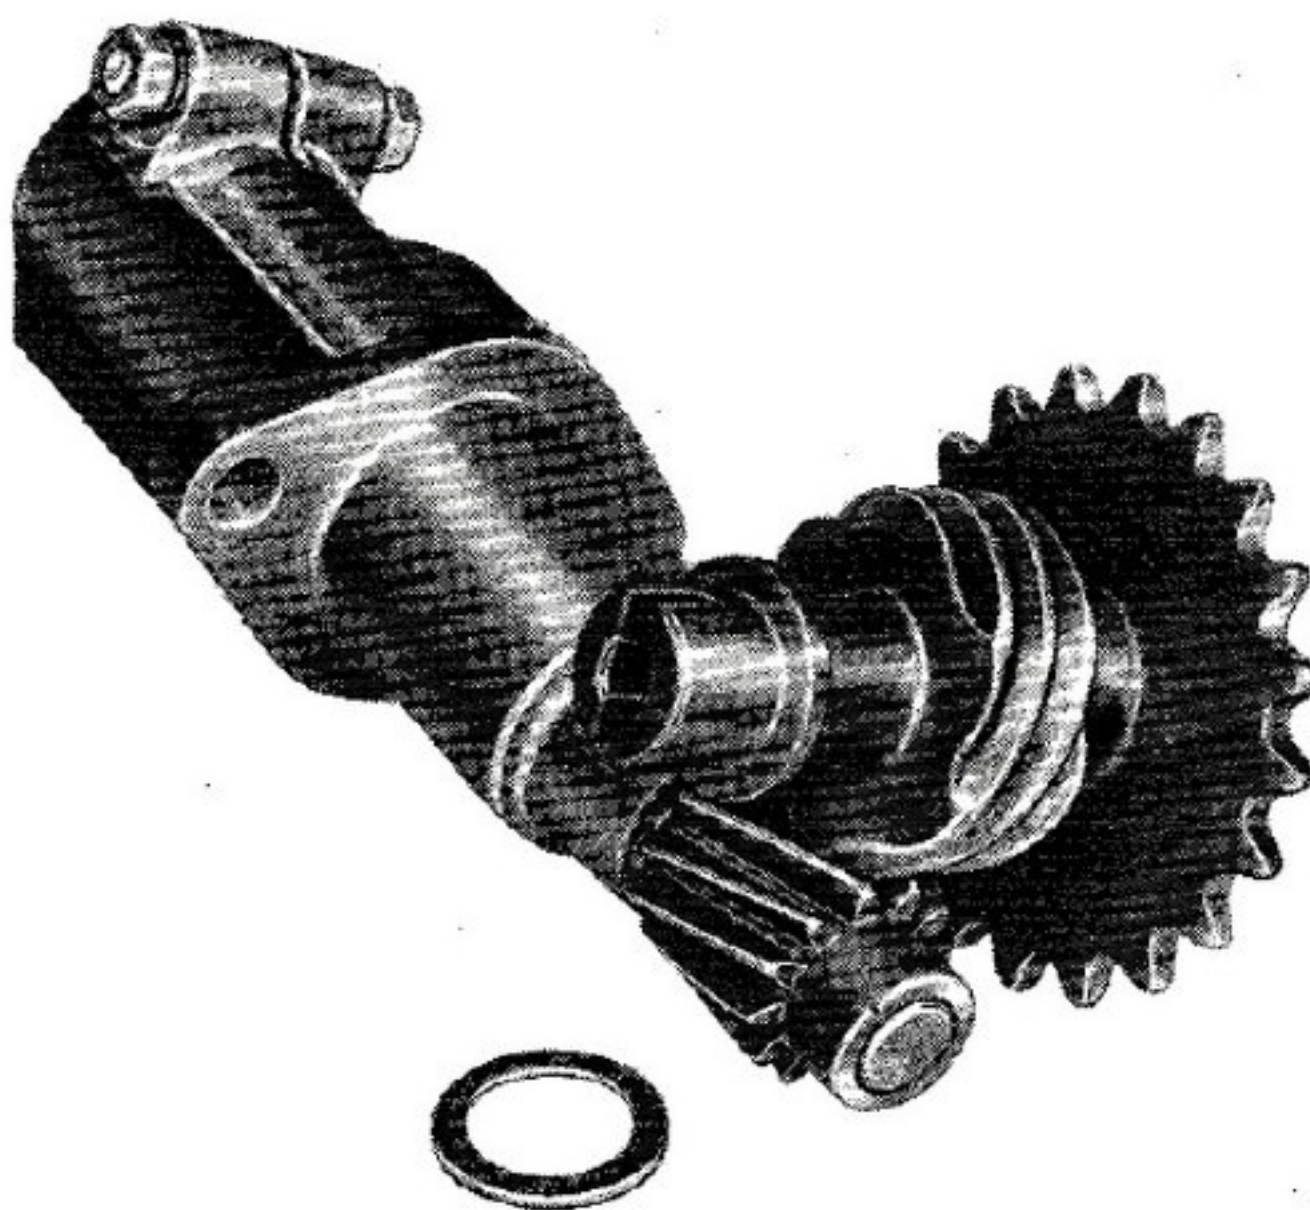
Ignition distributor-oil pump drive gear set and shaft, with thrust washer.
